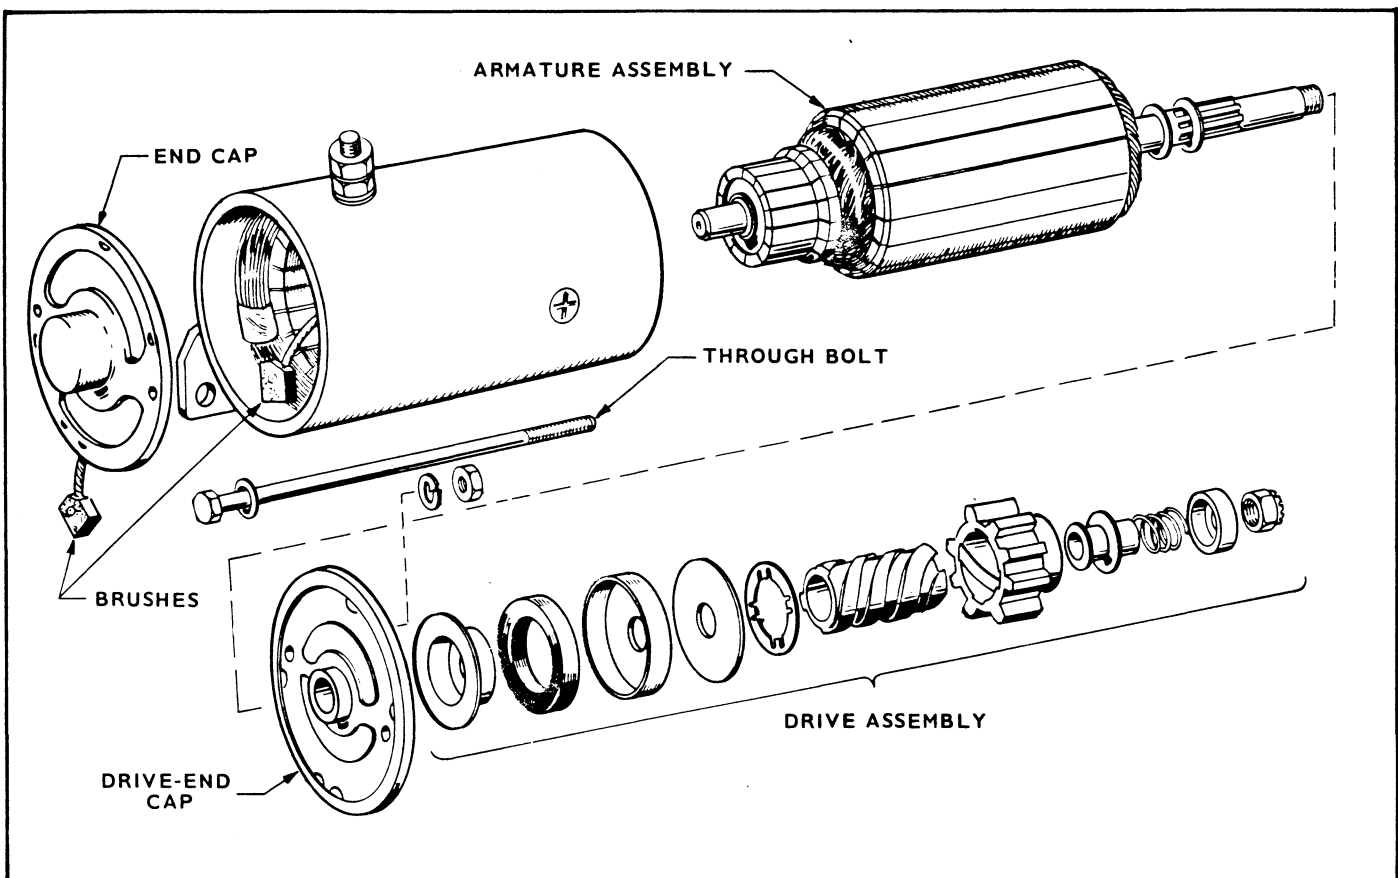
ELECTRIC STARTER ASSEMBLY
